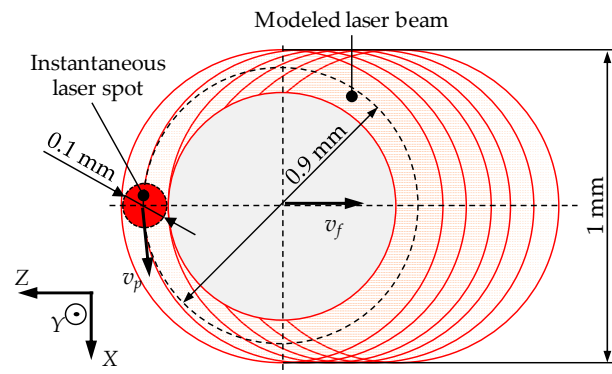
Wobble scanning technique employed for the welding operation.
